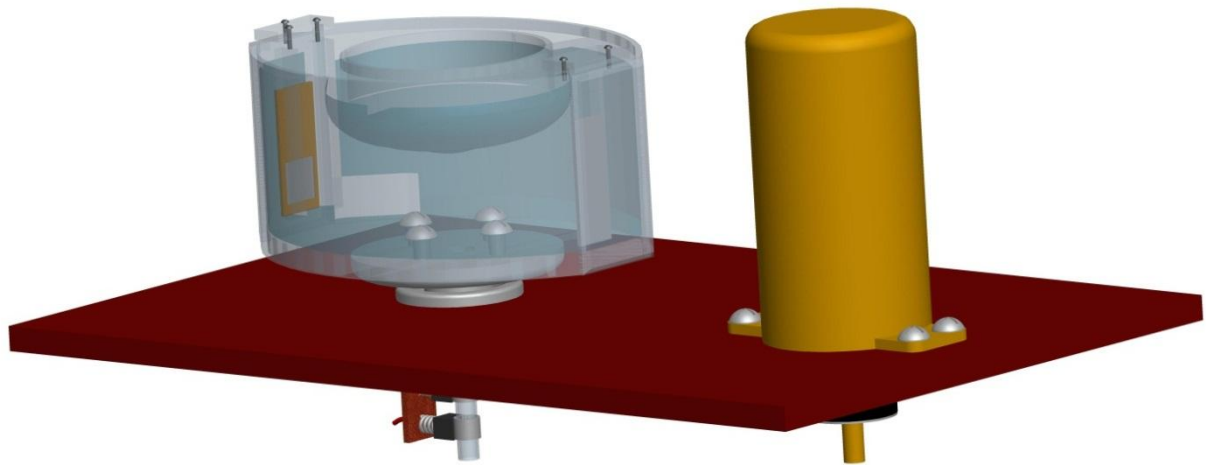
Isometric view of the complete Centrifugal Cell assembly.
